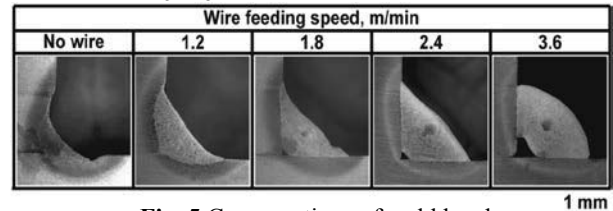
Cross sections of weld bead on various wire feeding speeds.
